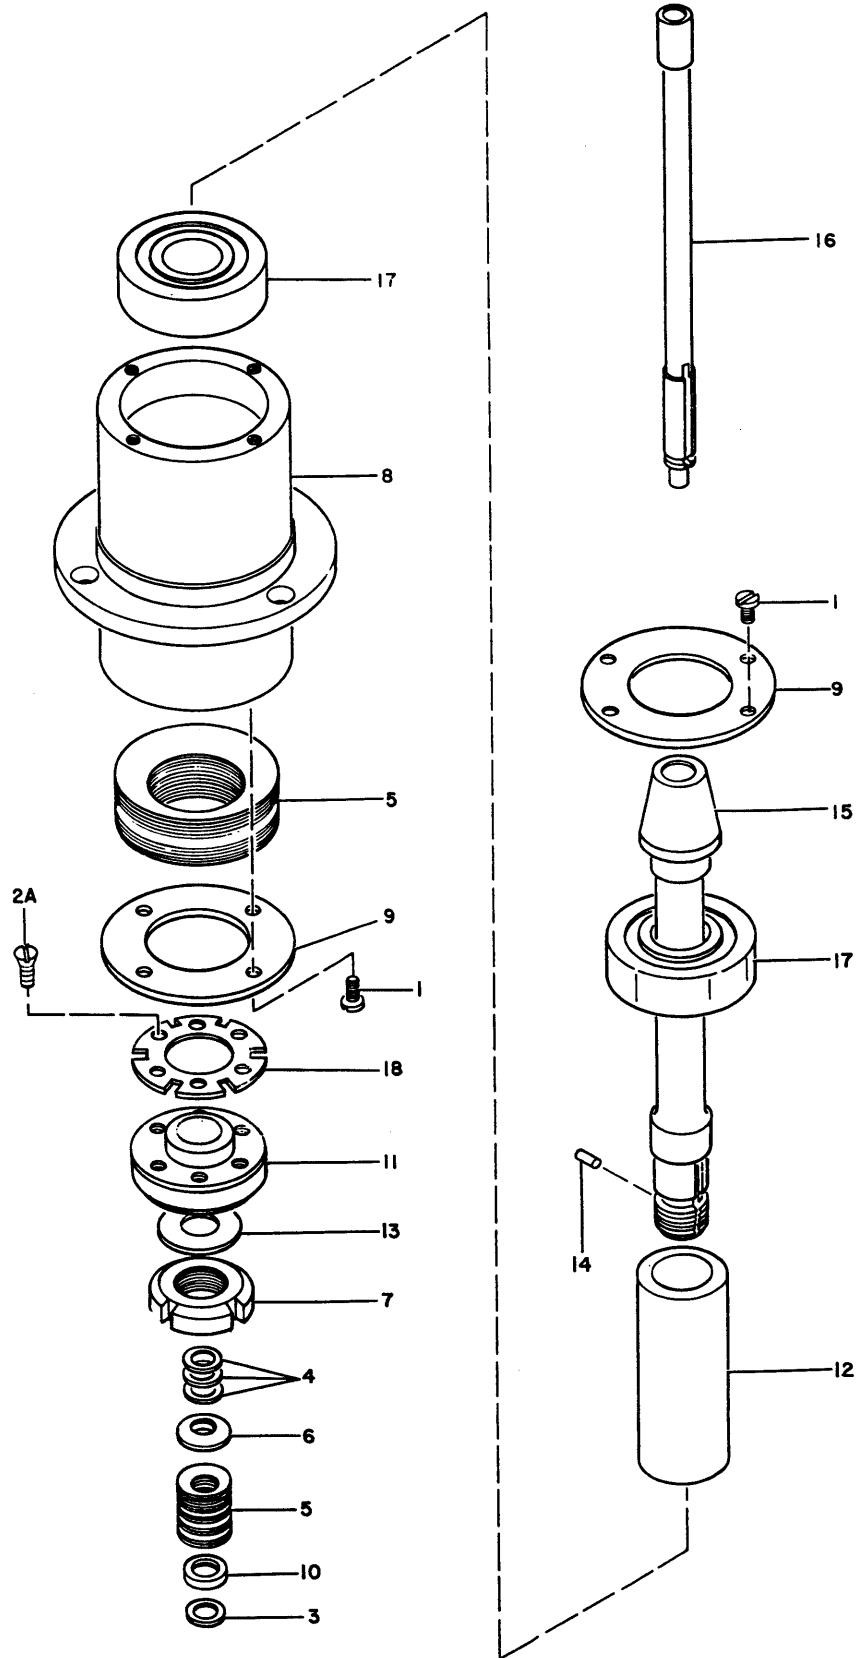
DISK PACK SPINDLE ASSEMBLY. SEE LIST 7.
